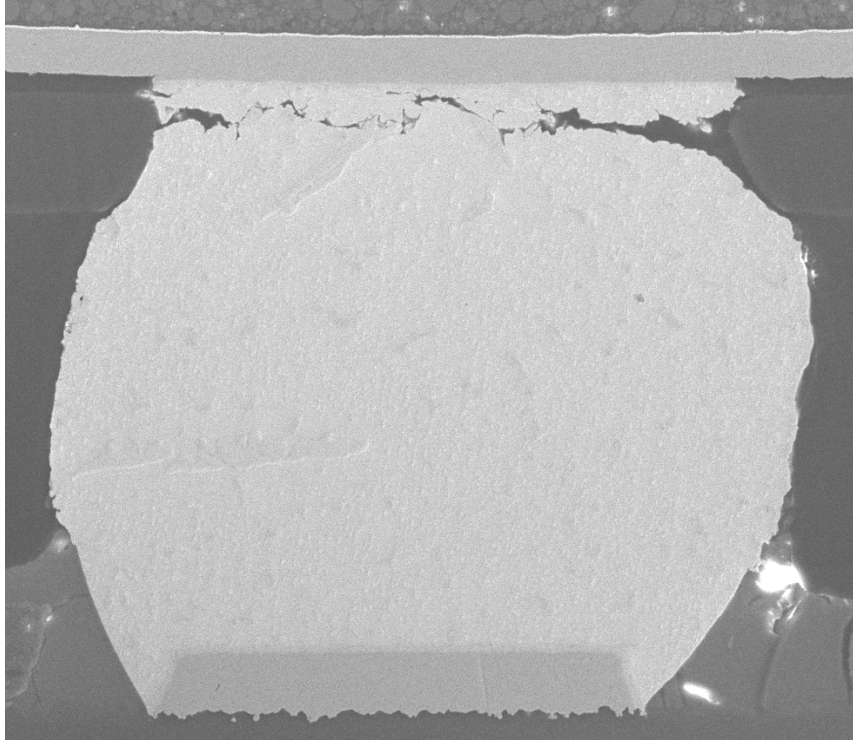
Typical Solder Joint Failure in 7mm Tape array BGA
